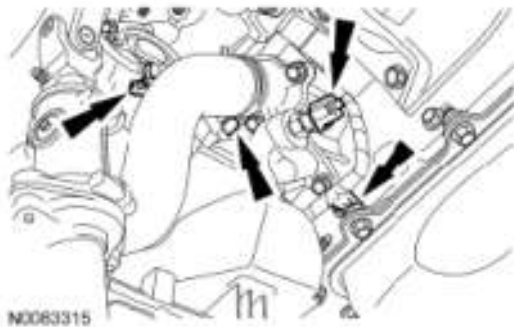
Locating Engine Oil Pressure (EOP) Switch Electrical Connector And Wiring Harness Retainers
